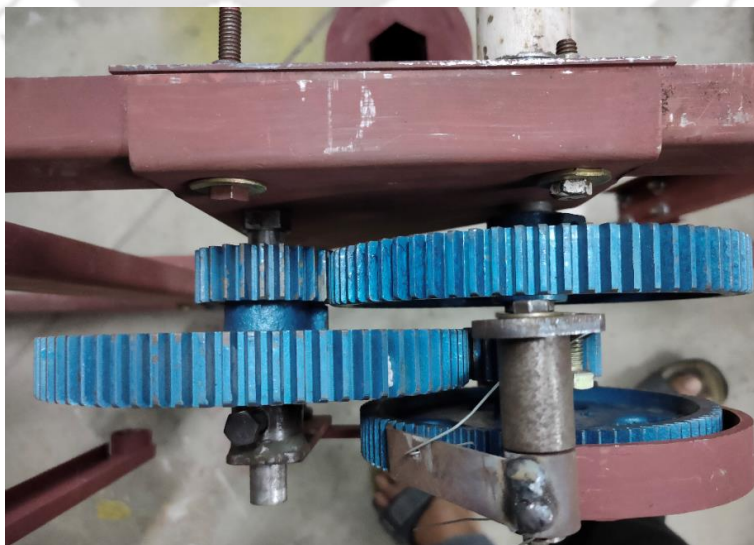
Top view of 5-wheel gear mechanism in the alpha model of semi-automatic handloom
